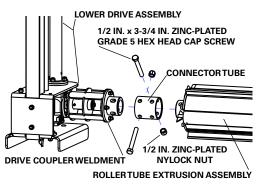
Attaching Drive Coupler Weldment to Lower Drive Assembly
